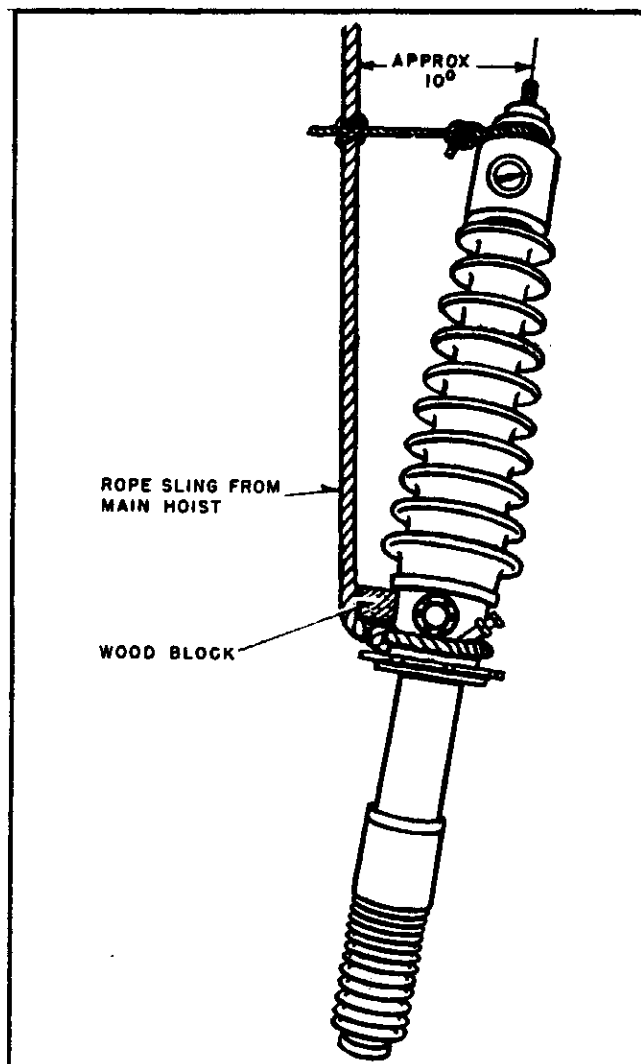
Method of Suspending a Condenser Bushing at Proper Angle for Inserting into Tank Top
